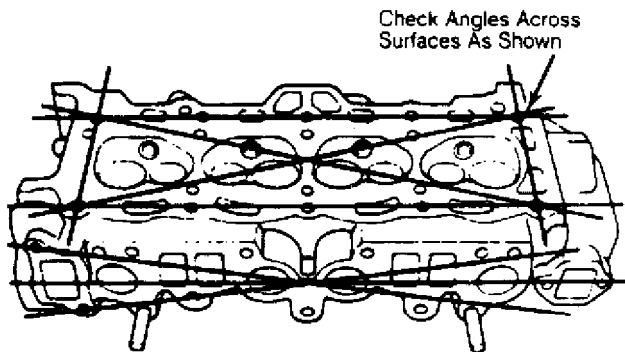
Checking Cylinder Head for Warpage - Typical
